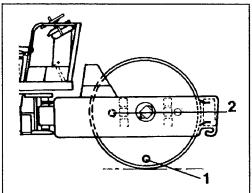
Draining the oil 1 Drain/filler plug 2 Sight glass
